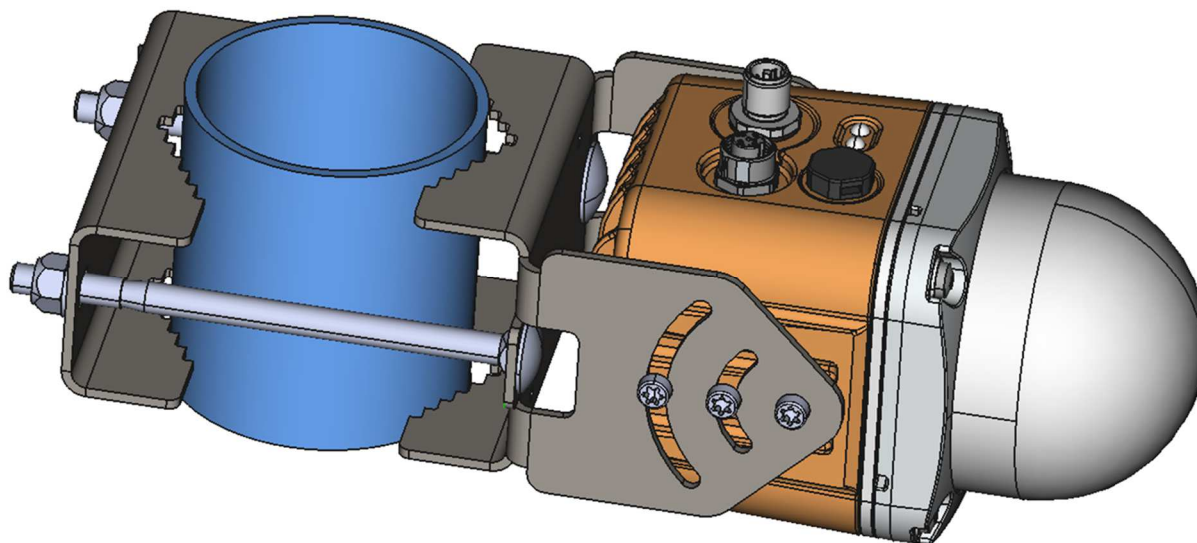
LPR[®]-1DHP-200 mounted to a pipe with the mounting bracket.
